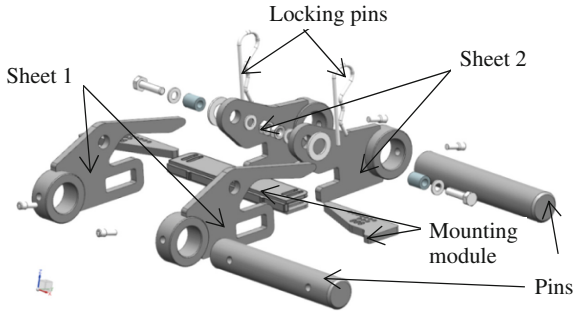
Device for quick coupling of the equipment of the electrical demolition machine
